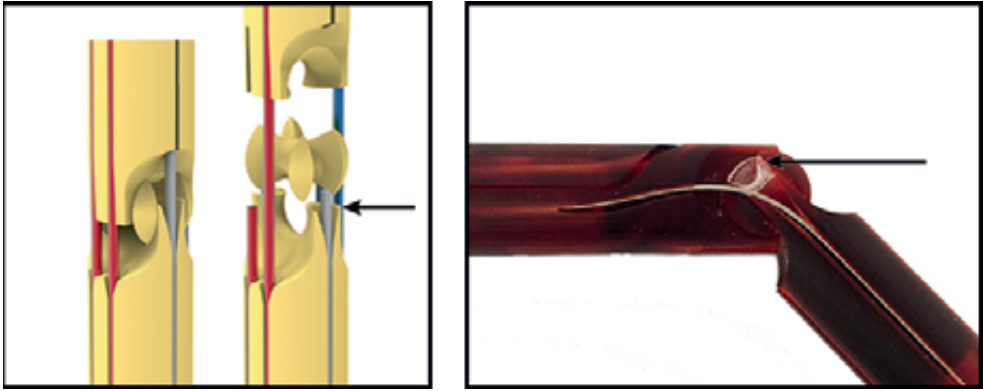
A6— Scaled Prototype Multi-Piece Non-Conduction Universal Joint. Left: Renderings of the *Multi-Piece Non-Conduction Universal Joint* consisting of two “shafts” with rounded cylindrical recesses and a spherical cross. Right: scaled (3x) printed prototype. The arrow indicates the weakest part of the prototype, which, when printed on a 5 mm scale, will be too weak. Therefore, this design was eliminated.
